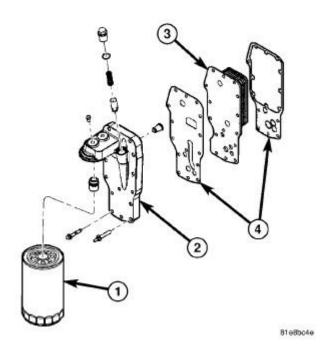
Oil Filter, Oil Cooler Housing, Oil Cooler & Gaskets Courtesy of CHRYSLER GROUP, LLC
